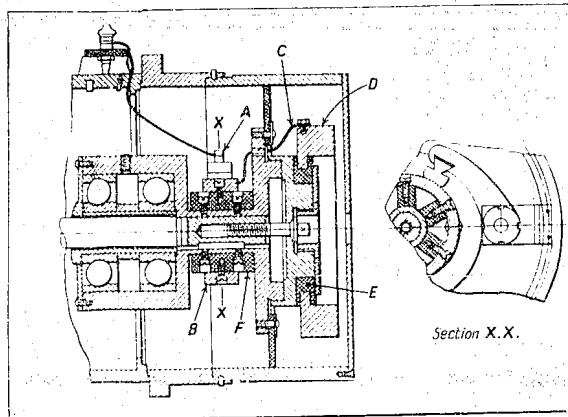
Sectional View of Disc and Spindle Assembly for the Electric Spark Method of Sharpening Carbide Tools
